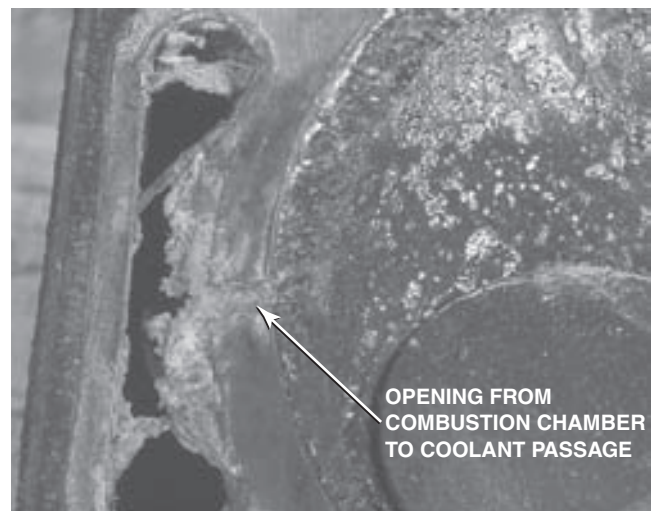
This defective cylinder head gasket was discovered as soon as the head was removed. This cylinder head will require machining or replacement.
